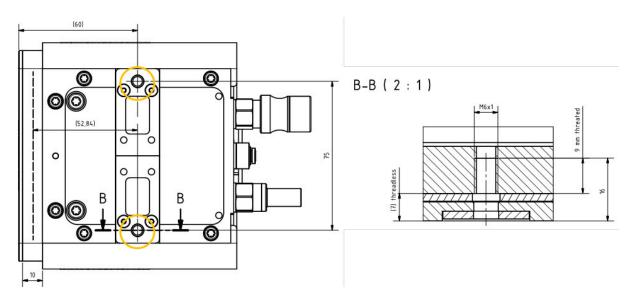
Drawing of the PILATUS3 X 100K-M detector head base plate (a printed copy is supplied in the user documentation folder). Left: View from below with retracted mounting brackets for mounting from below. Right: Cross section view through the internal thread to show the 7 mm thread-less and the 9 mm threaded sections.
